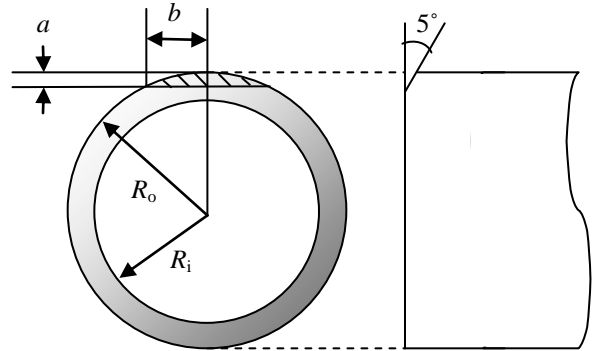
Cross section of the cutaway cracked pipe and the side view.
